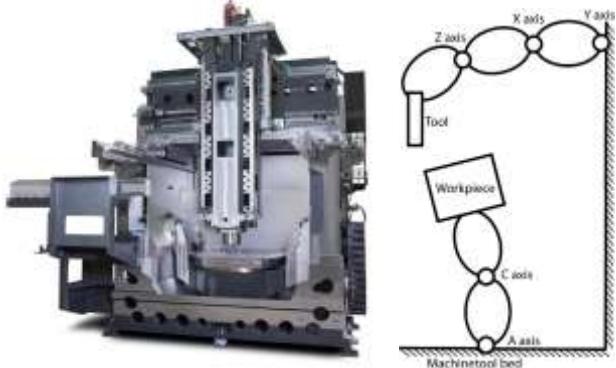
Tested 5-axis machine tool and its kinematic structure.
